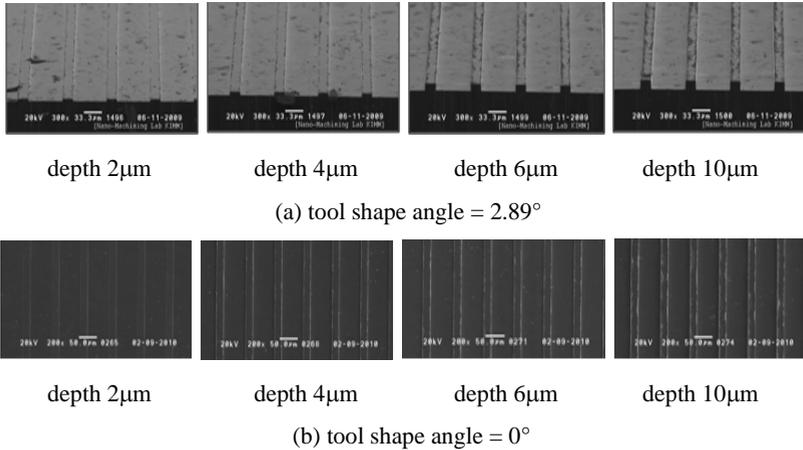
Comparison of machining surfaces varied by initial cutting depth and tool shape angle
